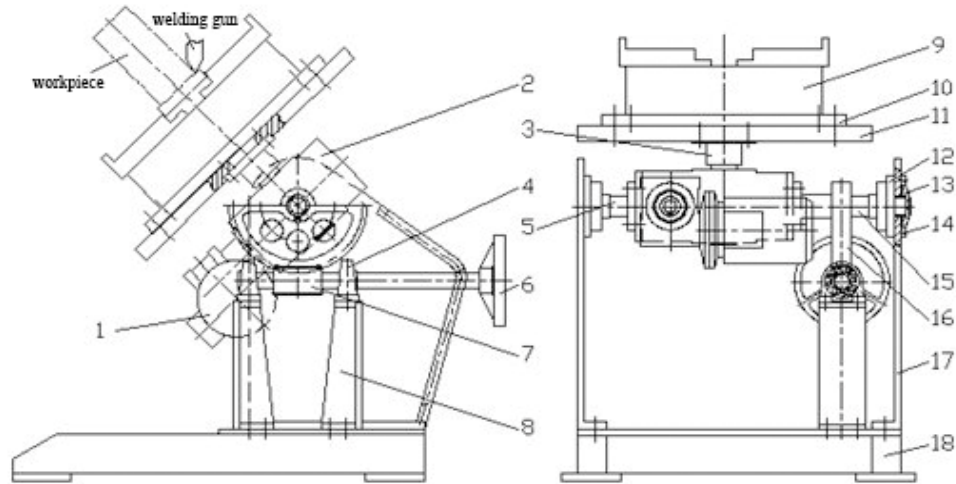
Crop production positioner structure; 1: Motor; 2: Multi-stage worm gear reducer; 3: Spindle; 4: Bearing; 5: Coupling shaft; 6: Handwheel; 7: Worm; 8: Supports; 9: Jaw chuck; 10: The coupling plate; 11: Table; 12: Bearing; 13: Dial; 14: Fixed disk; 15: The coupling shaft; 16: Worm; 17: Side; 18: Base
